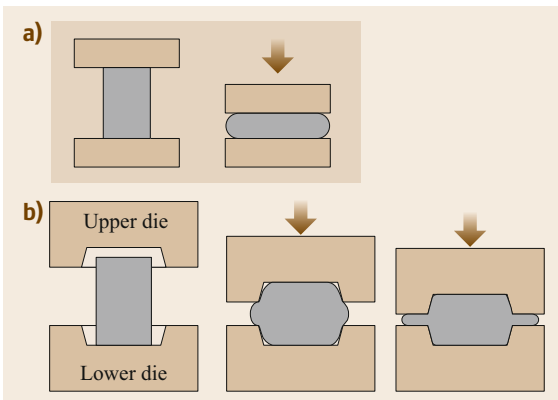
,b Forging: (a) upsetting, (b) impression forging
